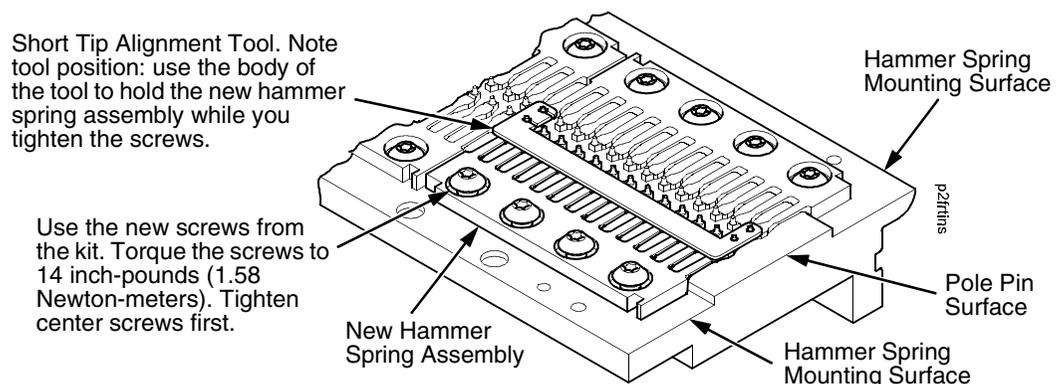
Hammer Spring Installation using Short Tip Alignment Tool
